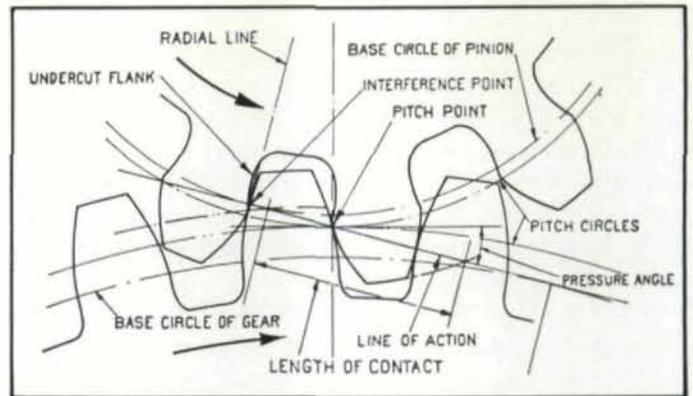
Diagram Showing Undercut Flank on Pinion Tooth to Avoid Involute Interference.
